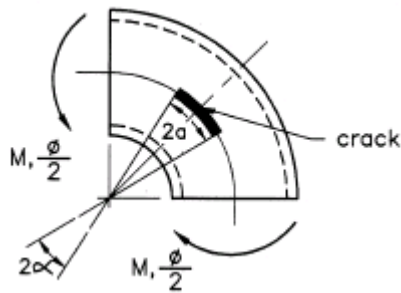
Sketch of elbow with through wall axial crack at crown
